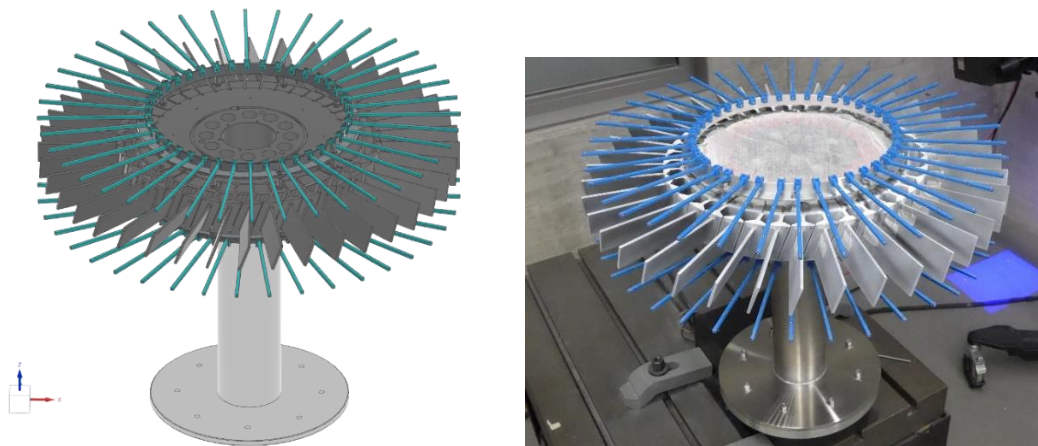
Blisk and mounting; CAD-model (left), photo of measurement setup (right)
